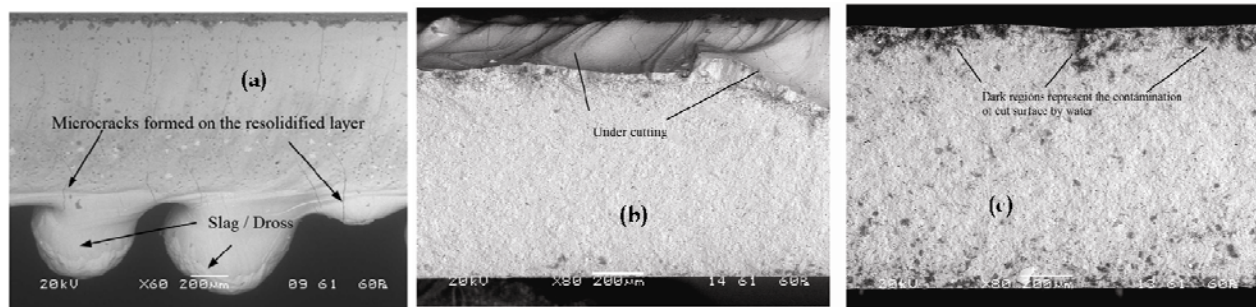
Cut cross-section in (a) melt & blow cutting (b): Air cooled thermal fracture (c): Laser/Waterjet cutting
